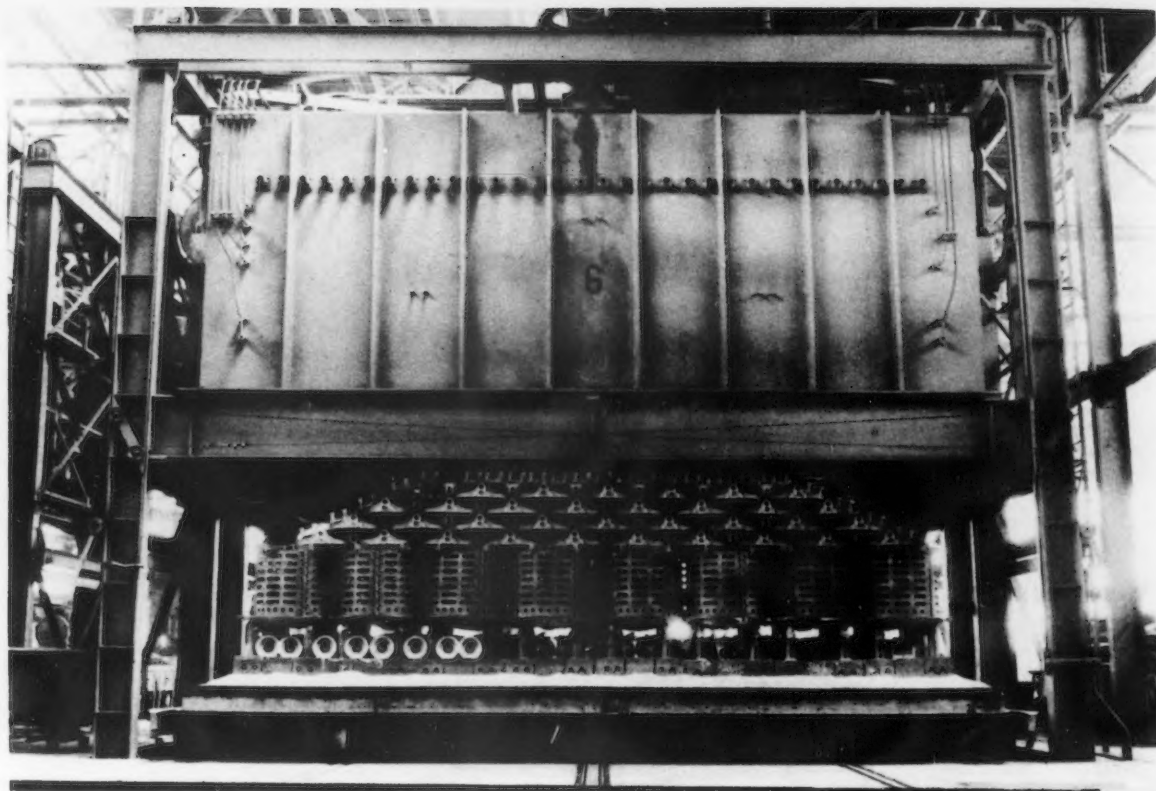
View showing car loaded with small castings packed in baskets and large castings stacked on top of baskets. Net weight of castings on this car was 15½ tons.
